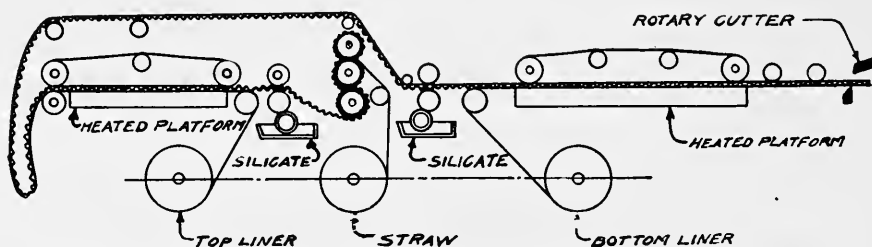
Machine for Making Double Faced Corrugated Paper.
